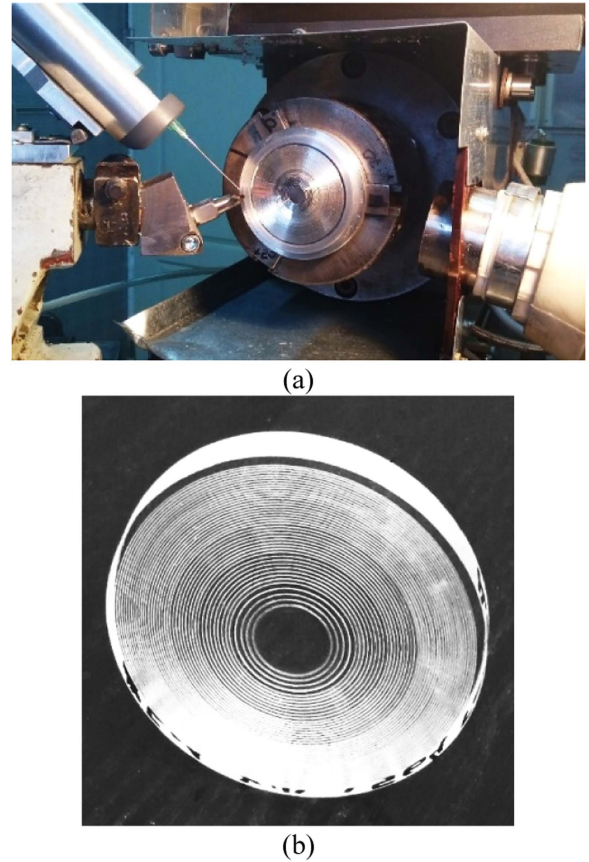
Modernized spindle block of IIR experimental DMC machine (a); general view of lens #05c1 (b).
